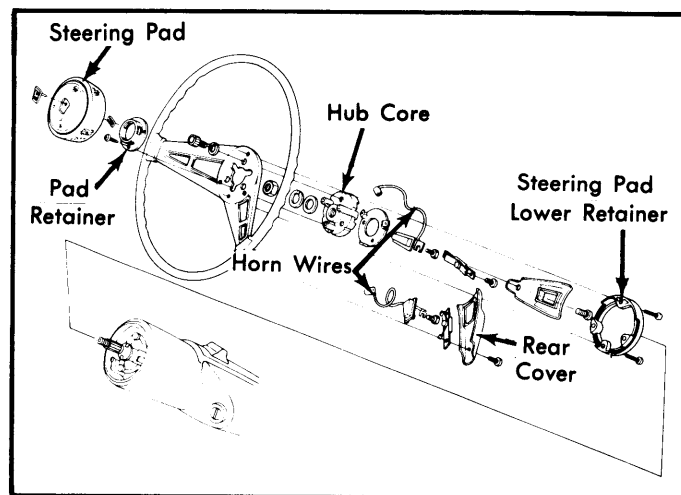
Exploded View of Civic CVCC Steering Wheel and Related Components
